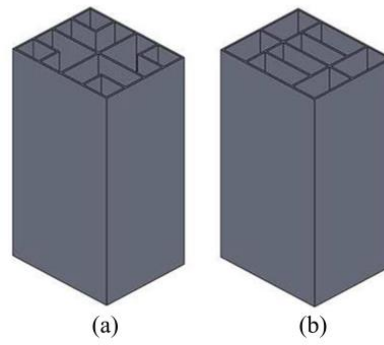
Geometry of the Multi-cell Tubes (a) Tube T4E (b) Tube T8E [42]
